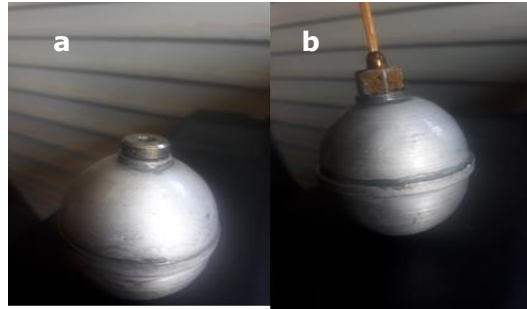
(a) Aluminium PCM capsule with screw cap. (b) Aluminium capsule with thermocouple screw cap.
